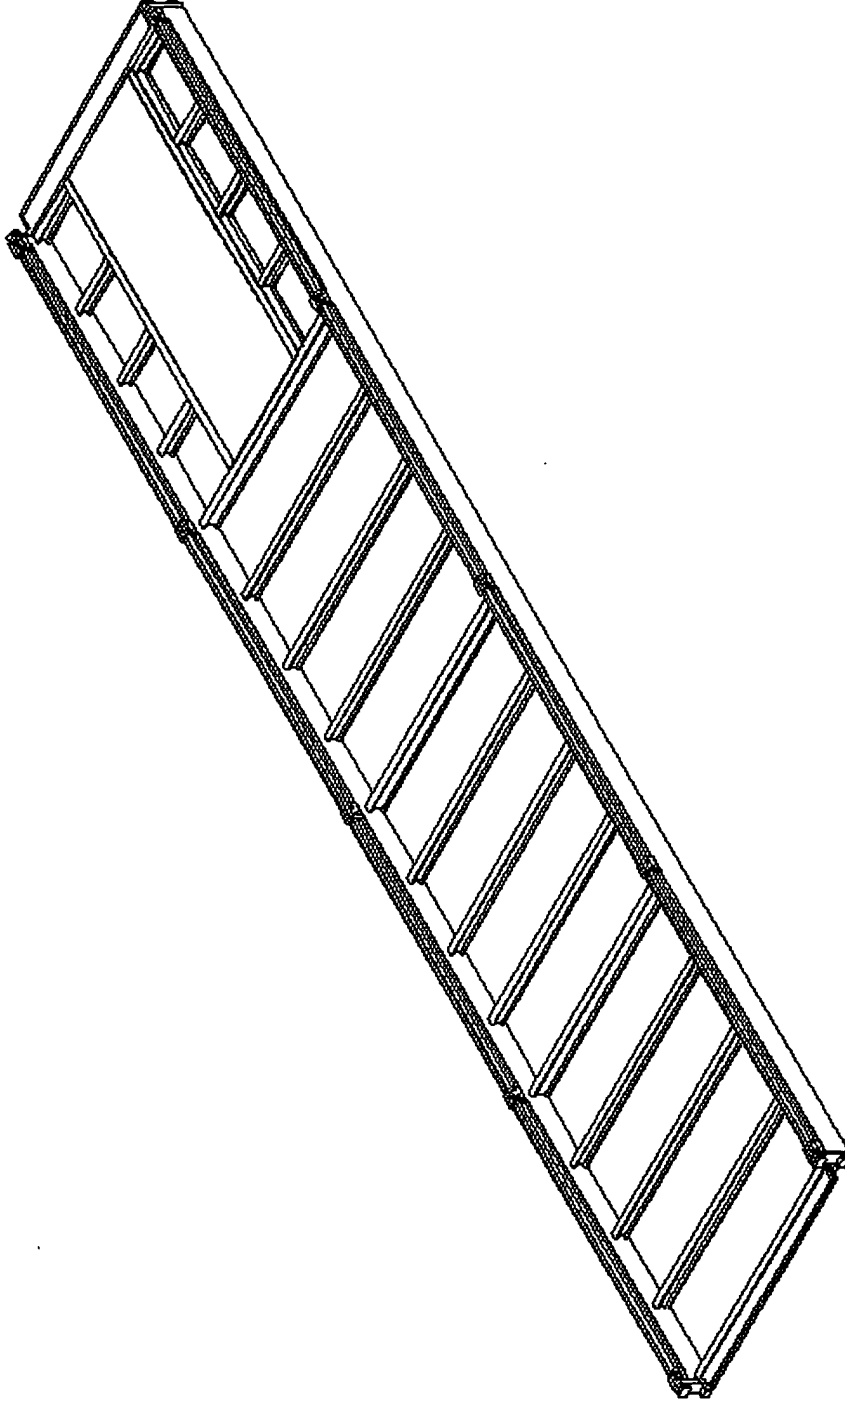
A: Basic isometric view of the floor frame (40 foot collapsible cargo container)
